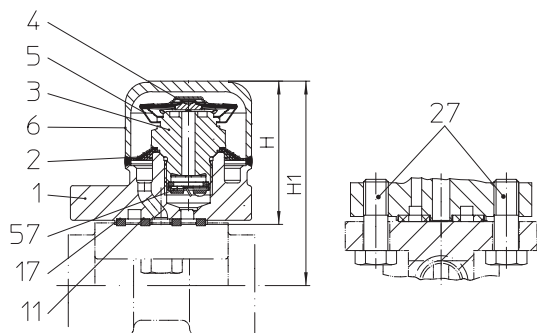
Universal flange with 2 x 3/8" UNC-thread
